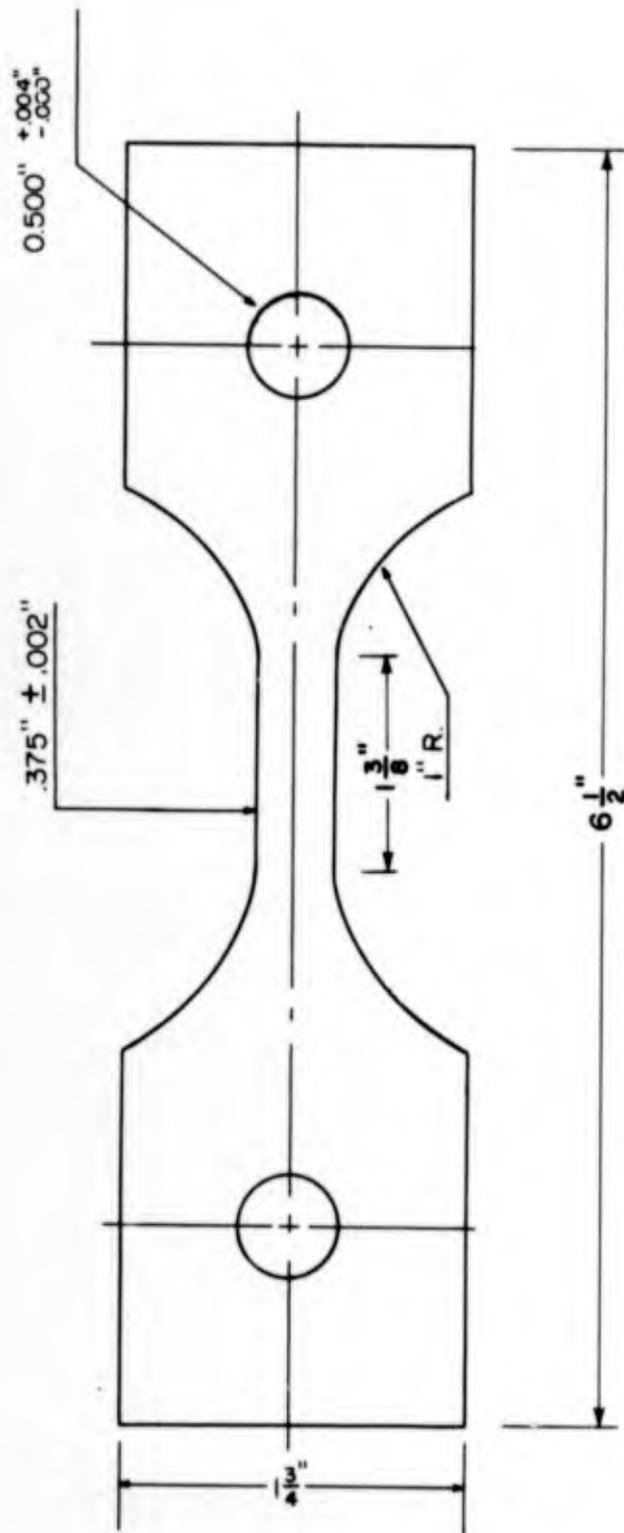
Smooth Sheet Tensile Specimen Geometry.
